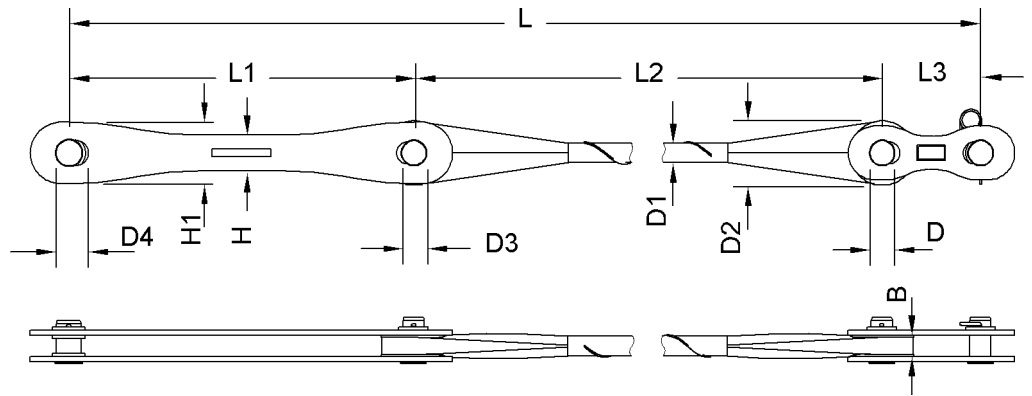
Dimensions of main boom pendant strap on 2821 boom head section
